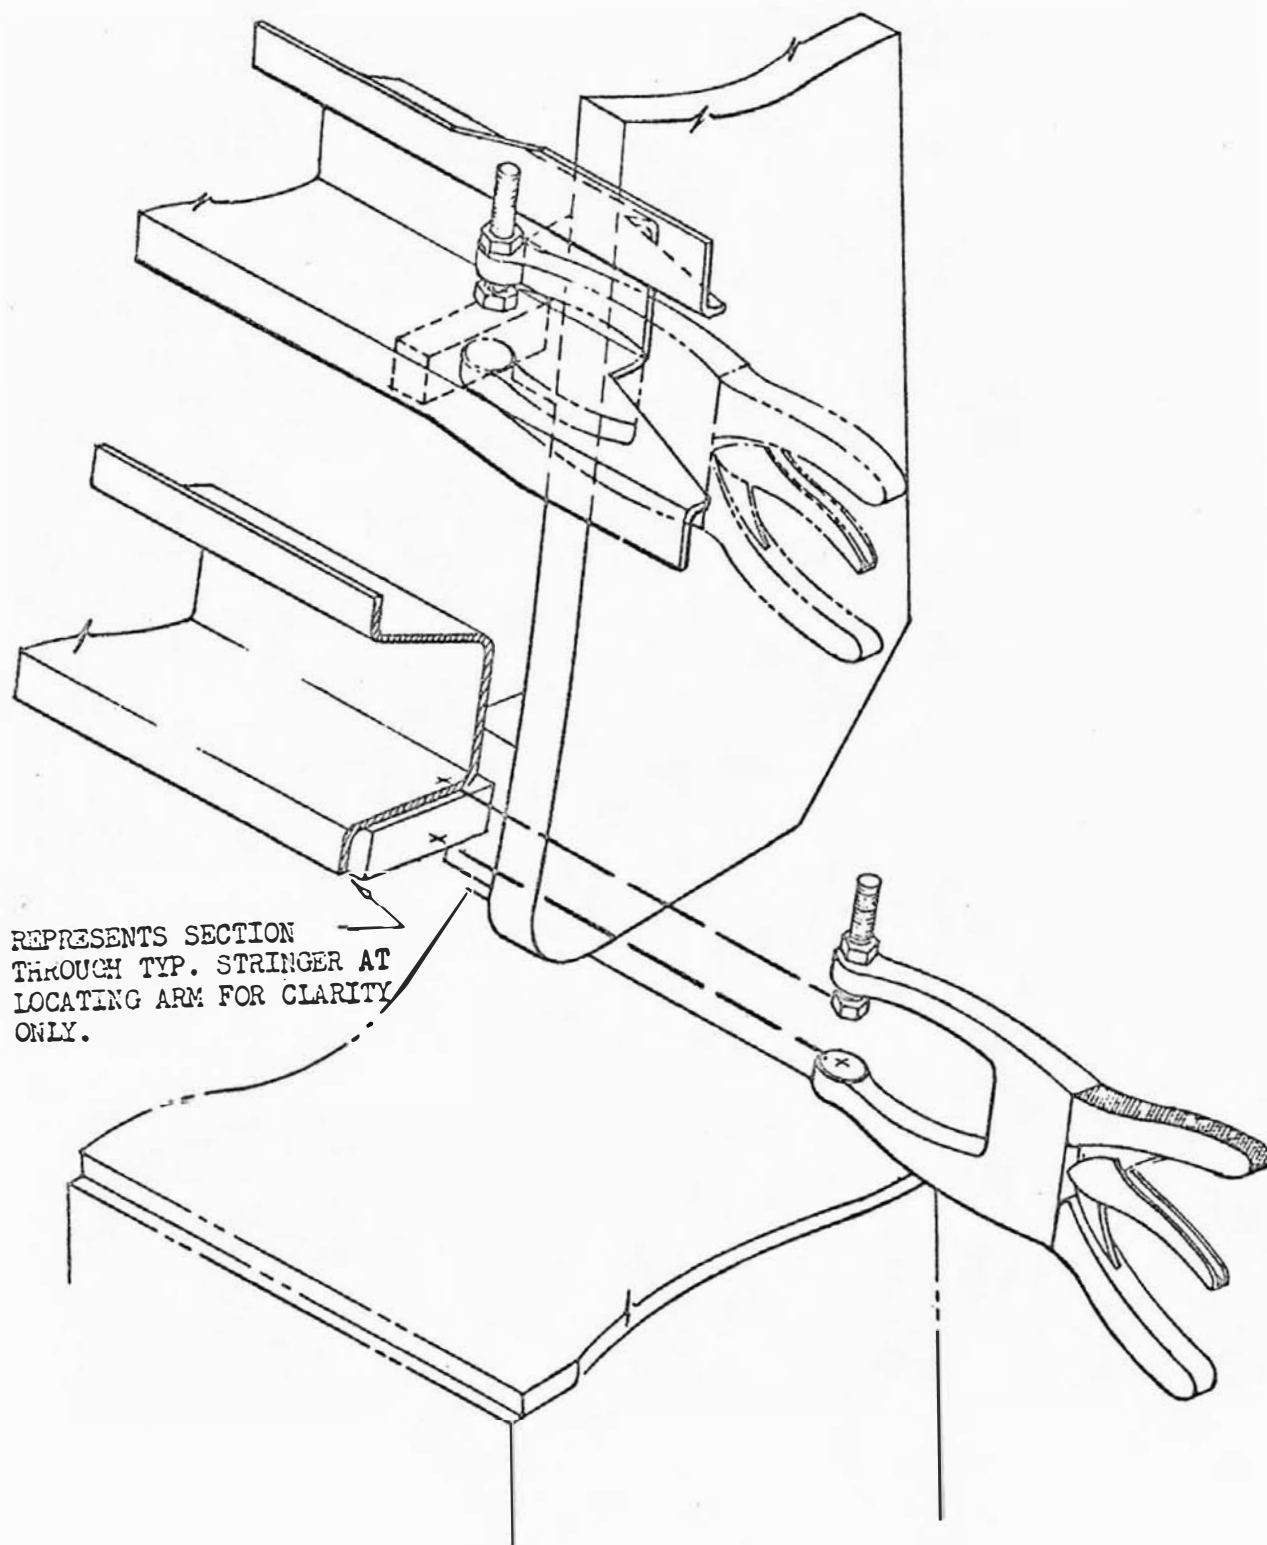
Skin Panel Assemblies Assembly Fixture AF-335-18100
